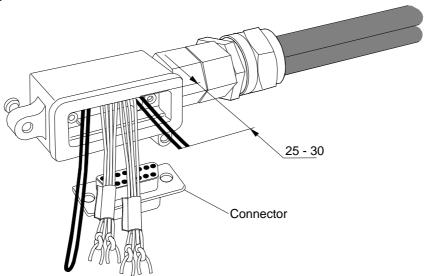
Slipping the wires through the connector cover and cutting them off.
